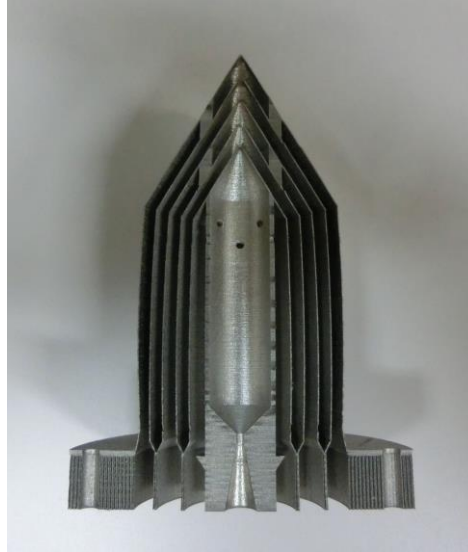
Half-cut model of the manufactured 3D-RJ (design A7).
